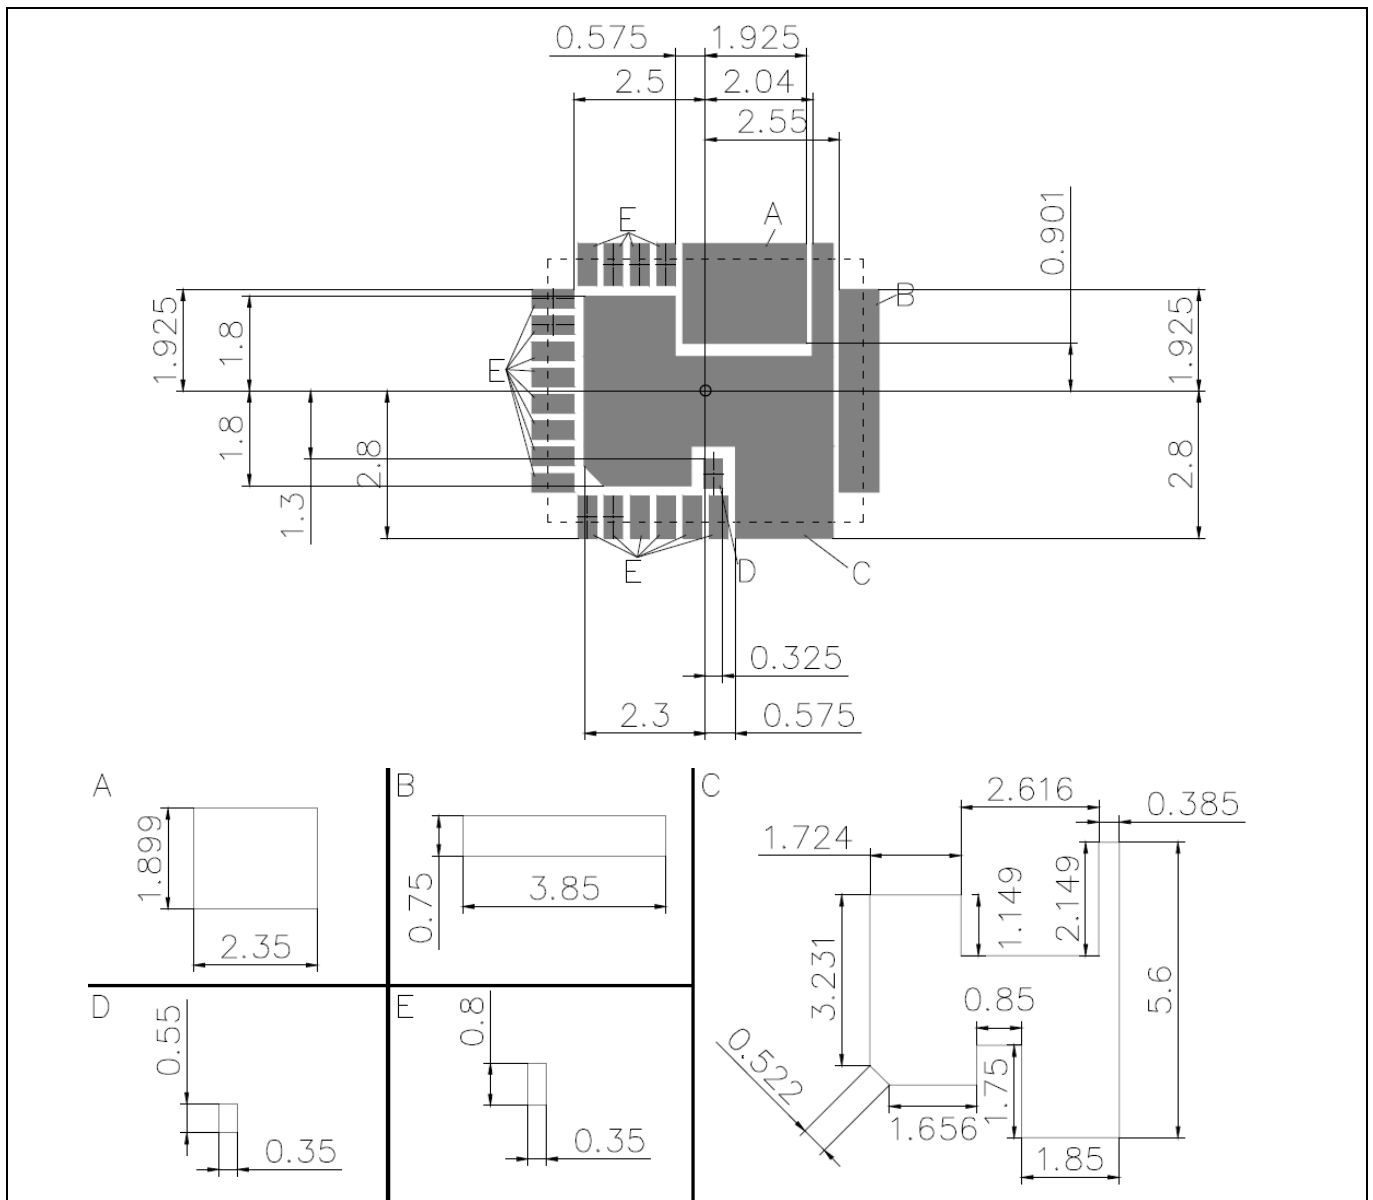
PCB metal pad sizing and spacing (all dimensions in mm)
